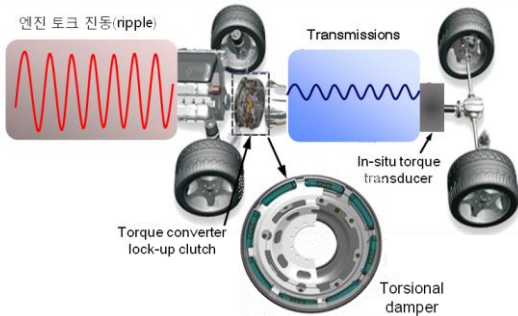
Schematic of torsional damper built in lock-up clutch of a torque converter
